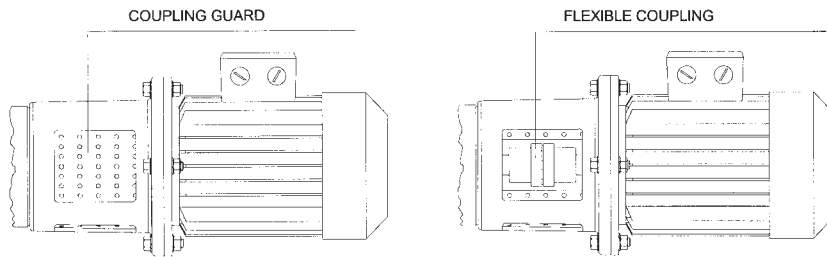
CHECKING THE ALIGNMENT ON MONOBLOCK DESIGN
